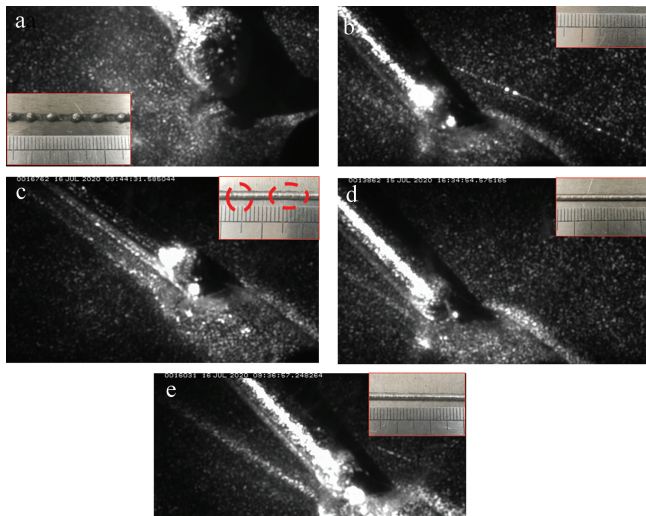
Droplet transfer and weld morphology in different distance between laser beam and wire
